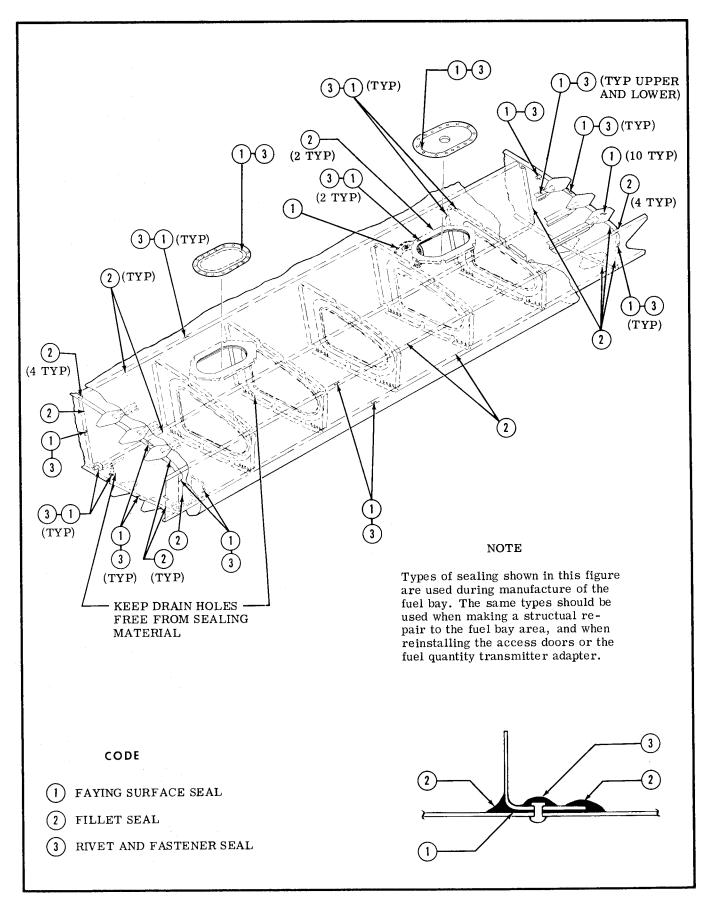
Fuel Bay Sealing (Sheet 1 of 2)
